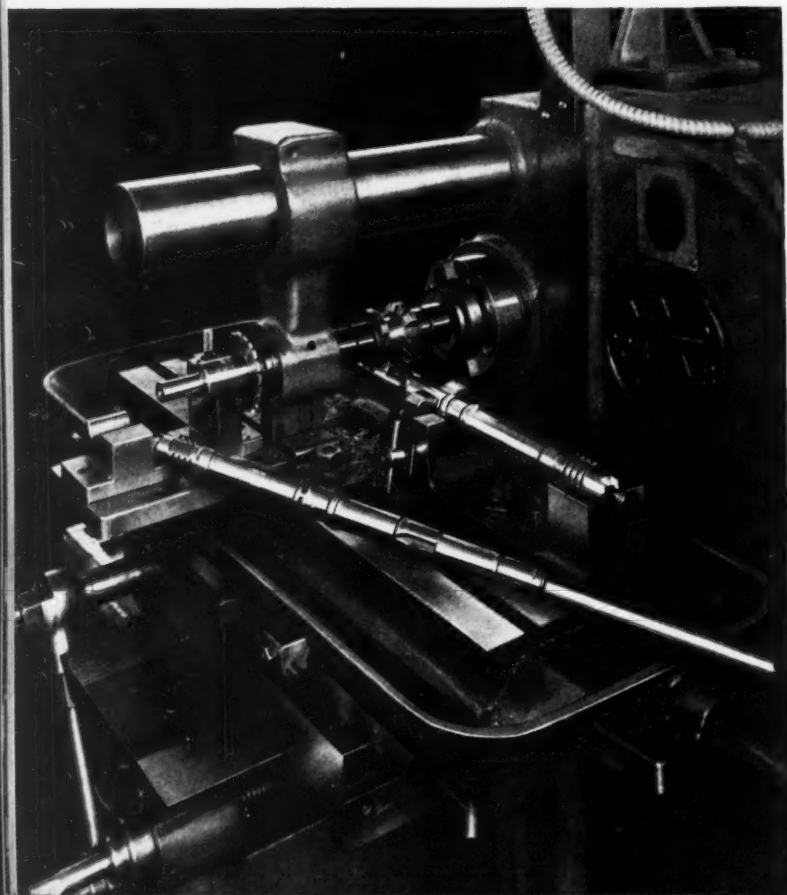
Hand Milling Machine Set up for Performing Three Operations on the Gun Barrels
